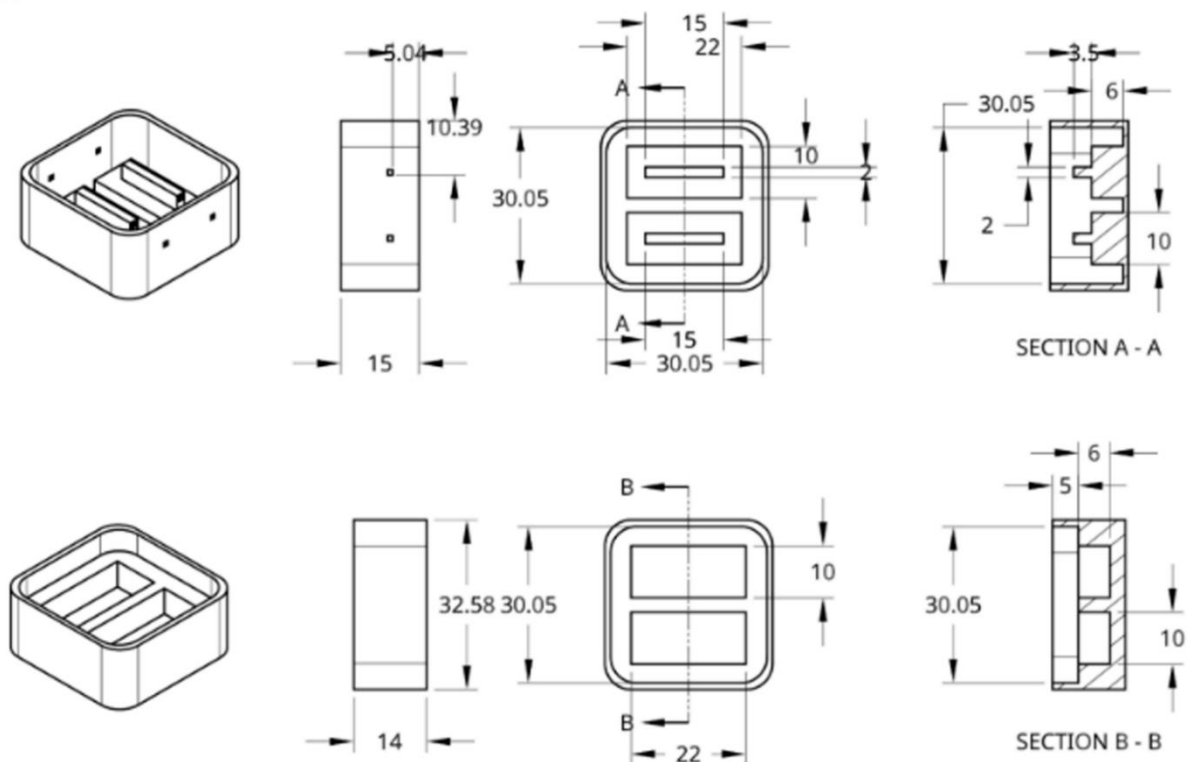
Designing the negative mold. Drawing of negative molds for the core device (upper panel) and the cover tap (lower panel) are respectively disposed in isometric view, right view, top view and transversal section view. Dimensions are in millimeters.
